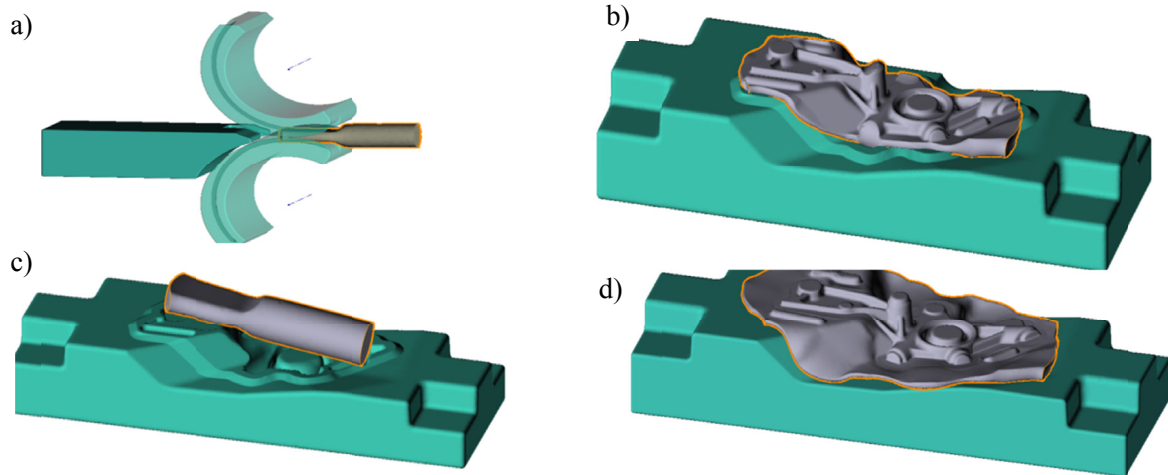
Material forming – filling of the impressions in particular operations: a) during rolling, b) arrangement of the slug in the roughing pass, c) preliminary forging, d) finishing forging
